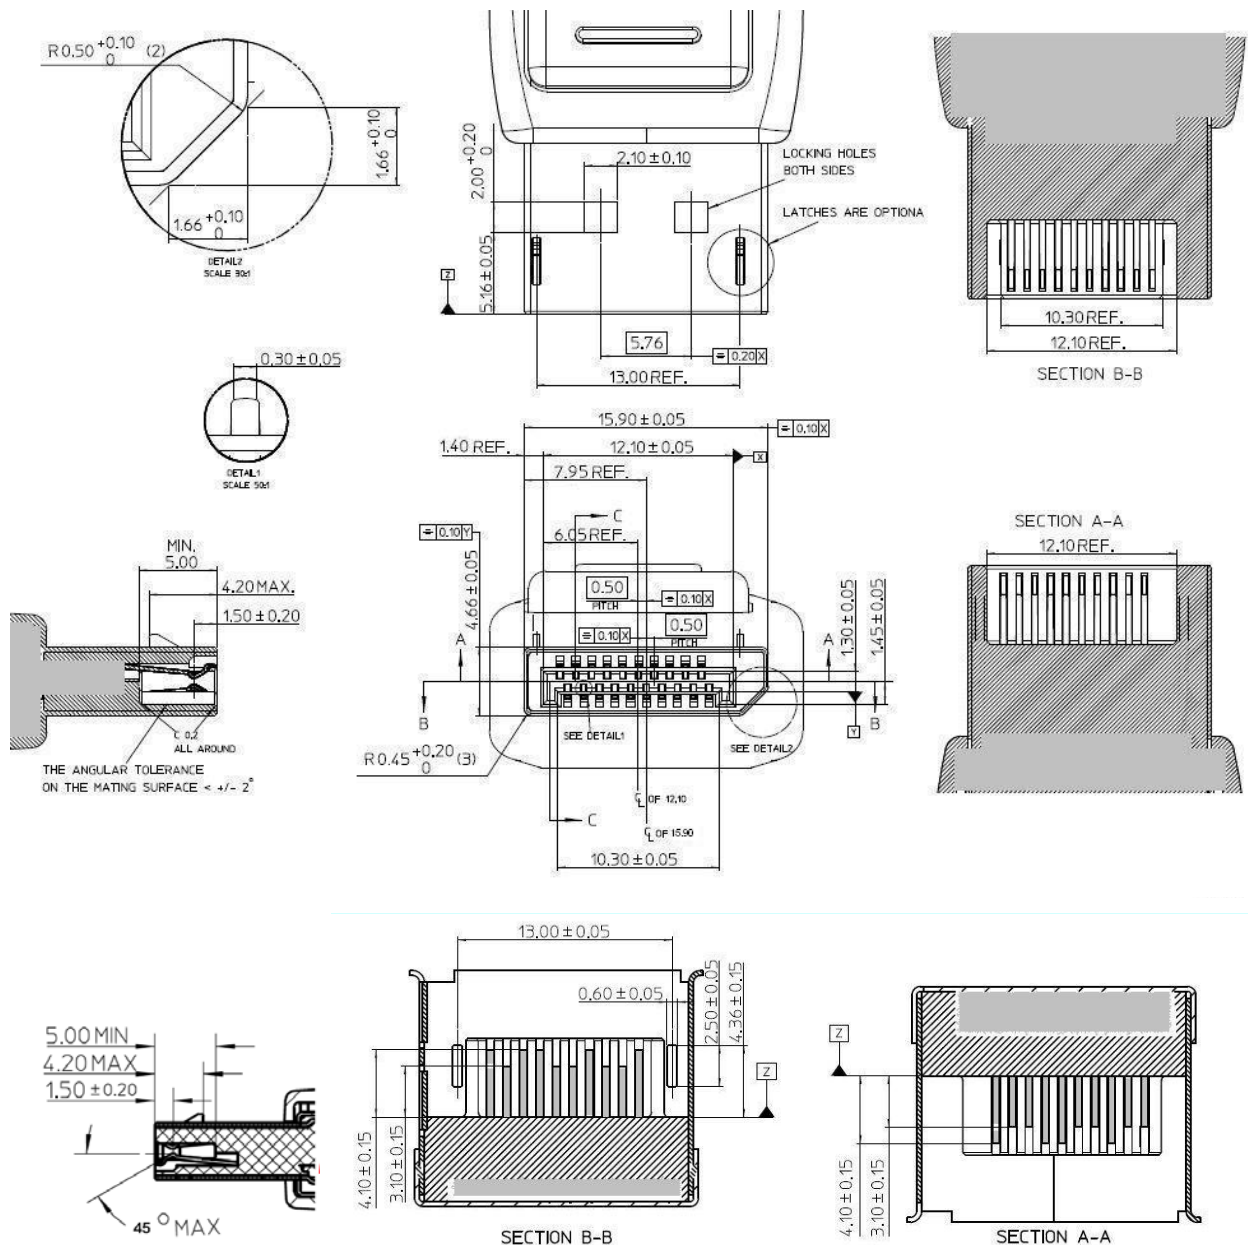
DisplayPort External Cable-Connector Assembly Drawings
